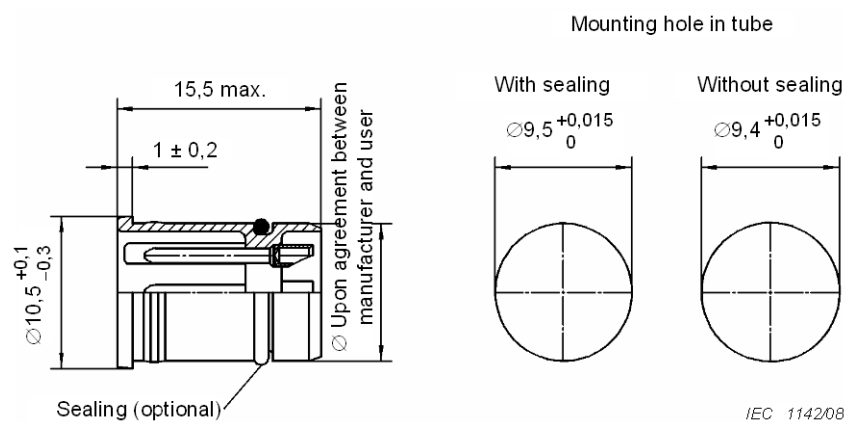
Tube insert, male contacts, mounting without thread (thread on tube)
